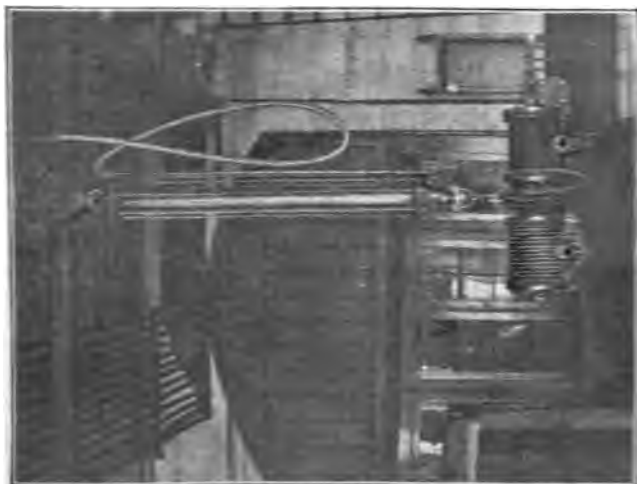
AIR HOIST HUNG FROM TRUCK, FORMING A TRAVELLING HOIST.
